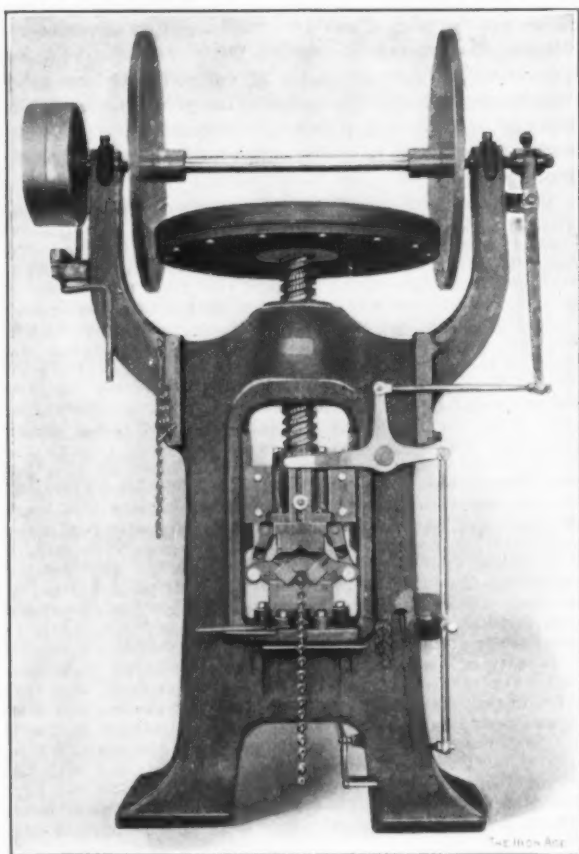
A Screw Press Equipped for Making Weldless Chains.
